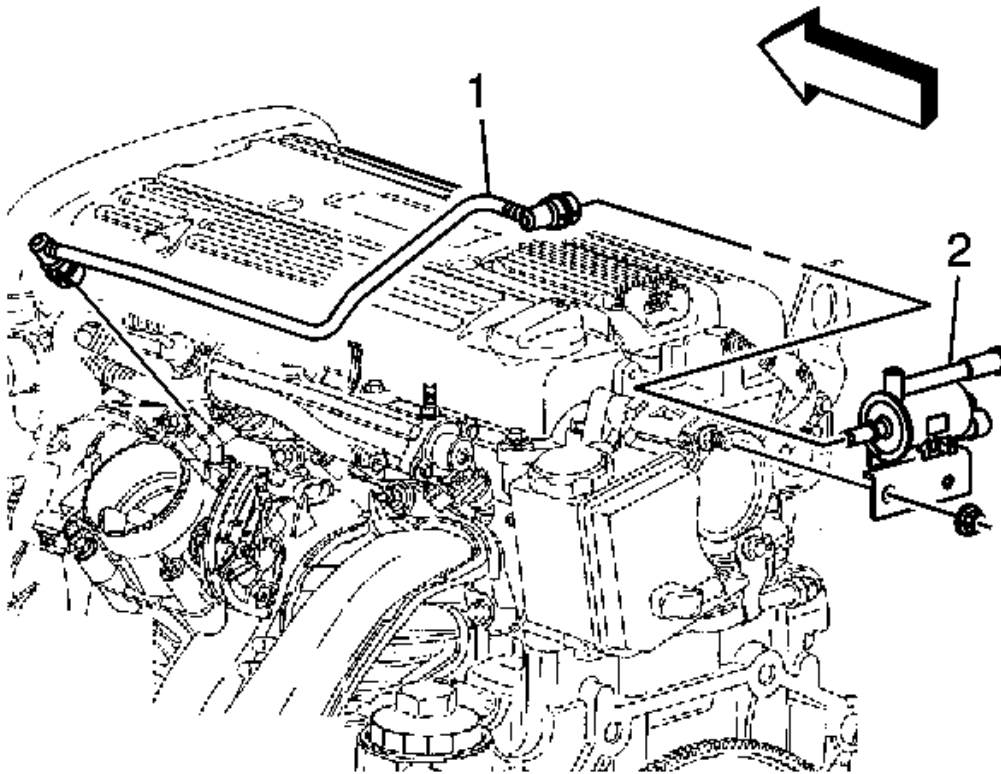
View of EVAP Emission Canister Valve Tube & Canister Valve
